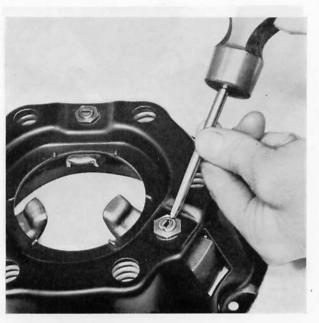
Locking an eye bolt nut by staking the nut collar into each end of the bolt slot
